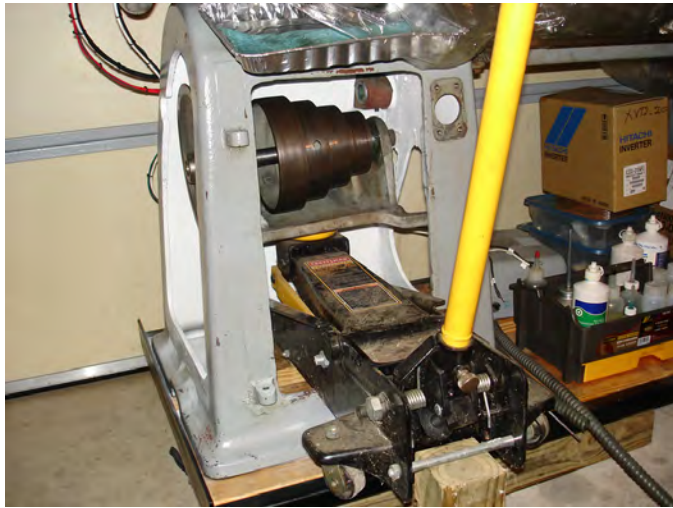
Installing the completed counterdrive assembly in the underdrive cabinet.
